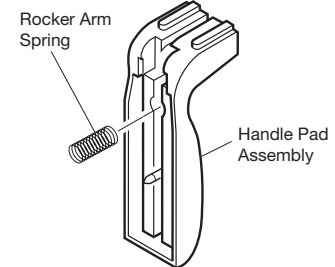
Removing Rocker Arm Spring from Handle Pad
